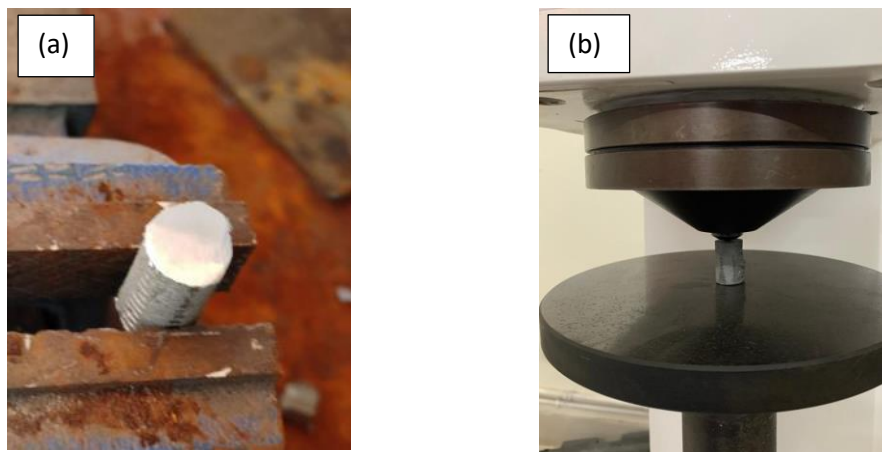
Hardness test specimen (a) After grinding and (b) During hardness test
